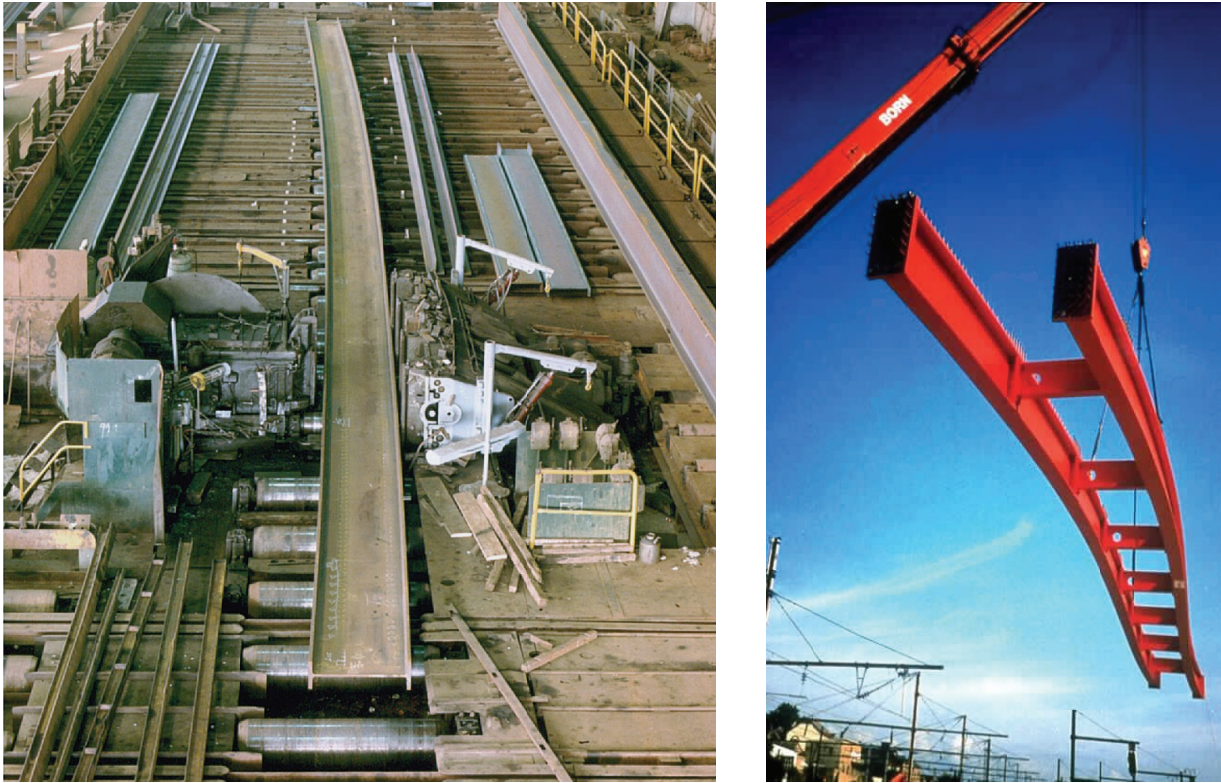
precambering of steel girders, end product (Hechler, 2010)
